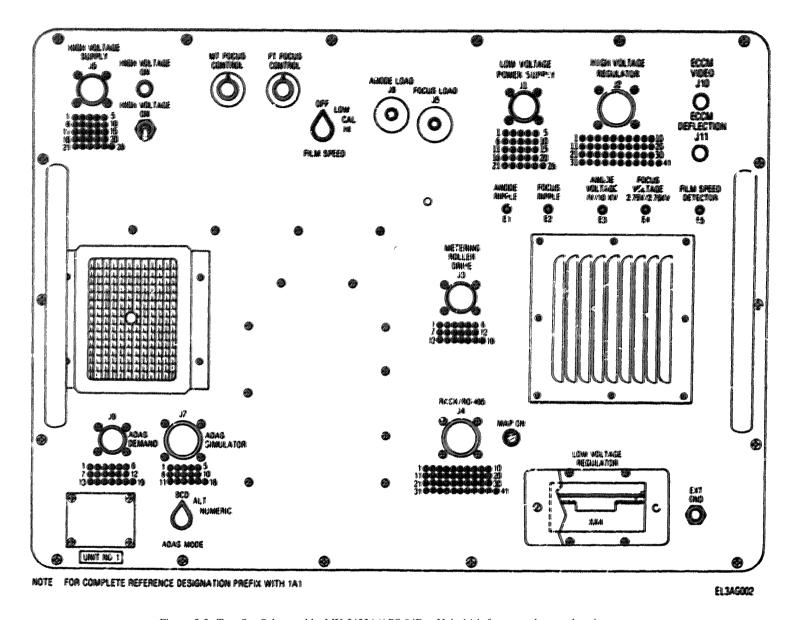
Test Set Subassembly MX-3433A/APS-94D, Unit 1A1 front panel, parts location.
